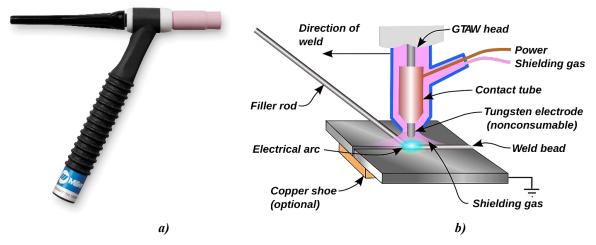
a) TIG welding gun [13] b) TIG welding process schematic [14]
